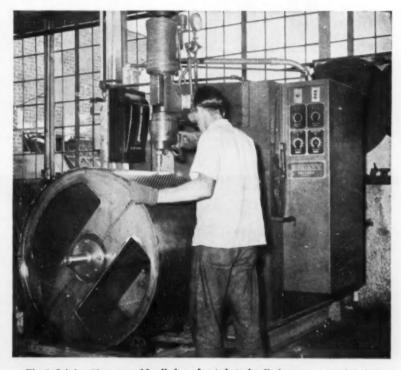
Joining 12 gauge cold rolled, perforated steel cylinder wrapper to housing. Welding is accomplished at flanged edge of head. The wrapper is formed in two semi-circles. The ends of the semi-circles butt against projecting edge of two partitions. This joint is fused with an arc welding torch.
